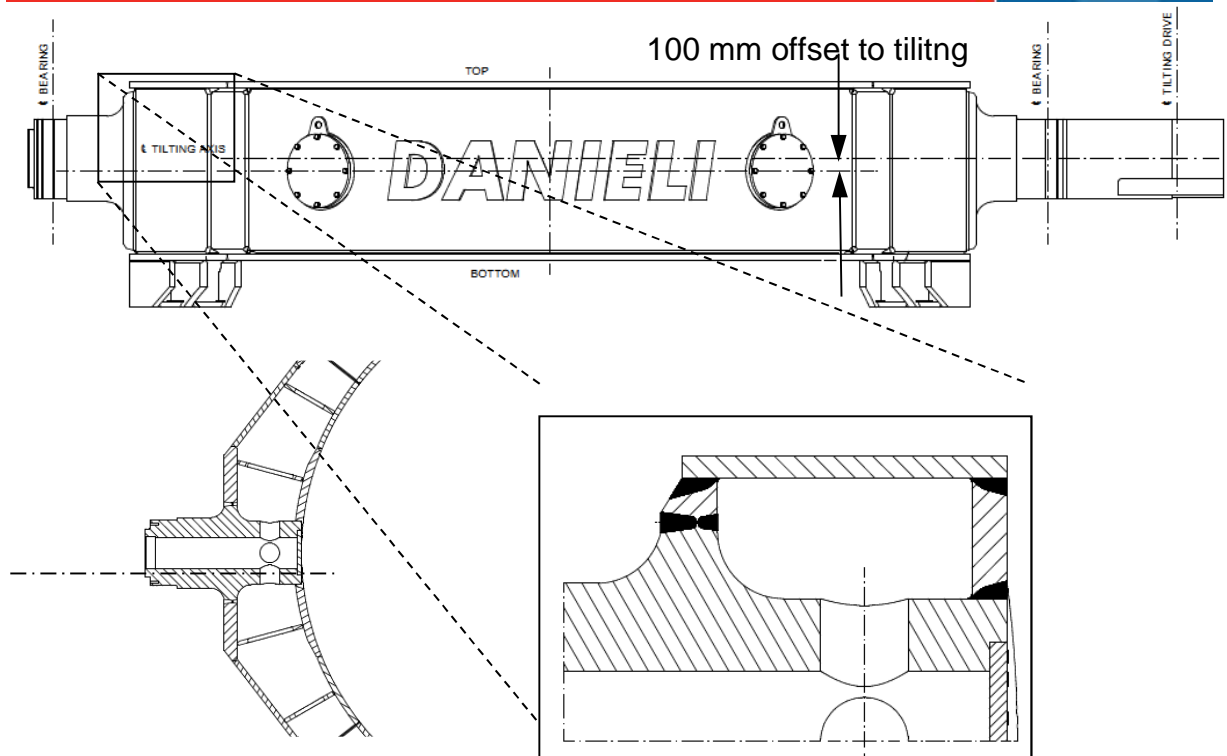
Details of trunnion ring design with welded in pins.
